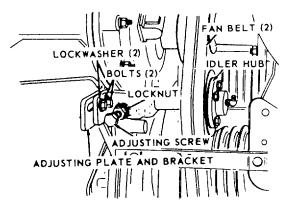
Fan drive belt adjustment (sheet 1 of 2).
